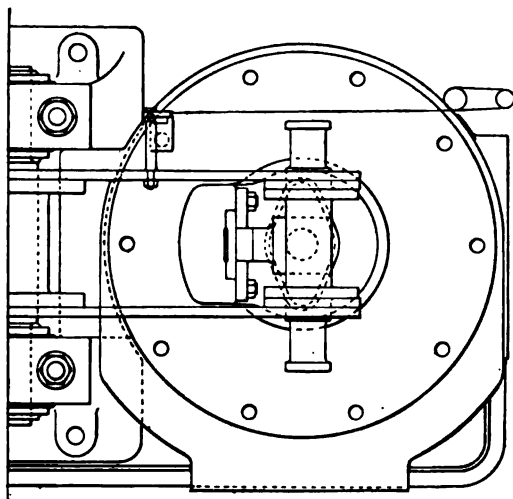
Air Pump. Davey, Paxman, & Co., Ltd., Colchester. (End View.)
